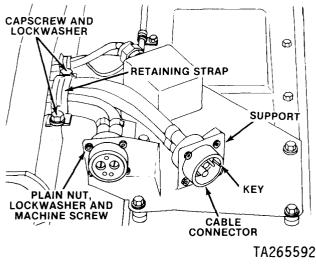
Removing or Installing Starter, Smoke, and Dust Detector Electrical Cable Connector
